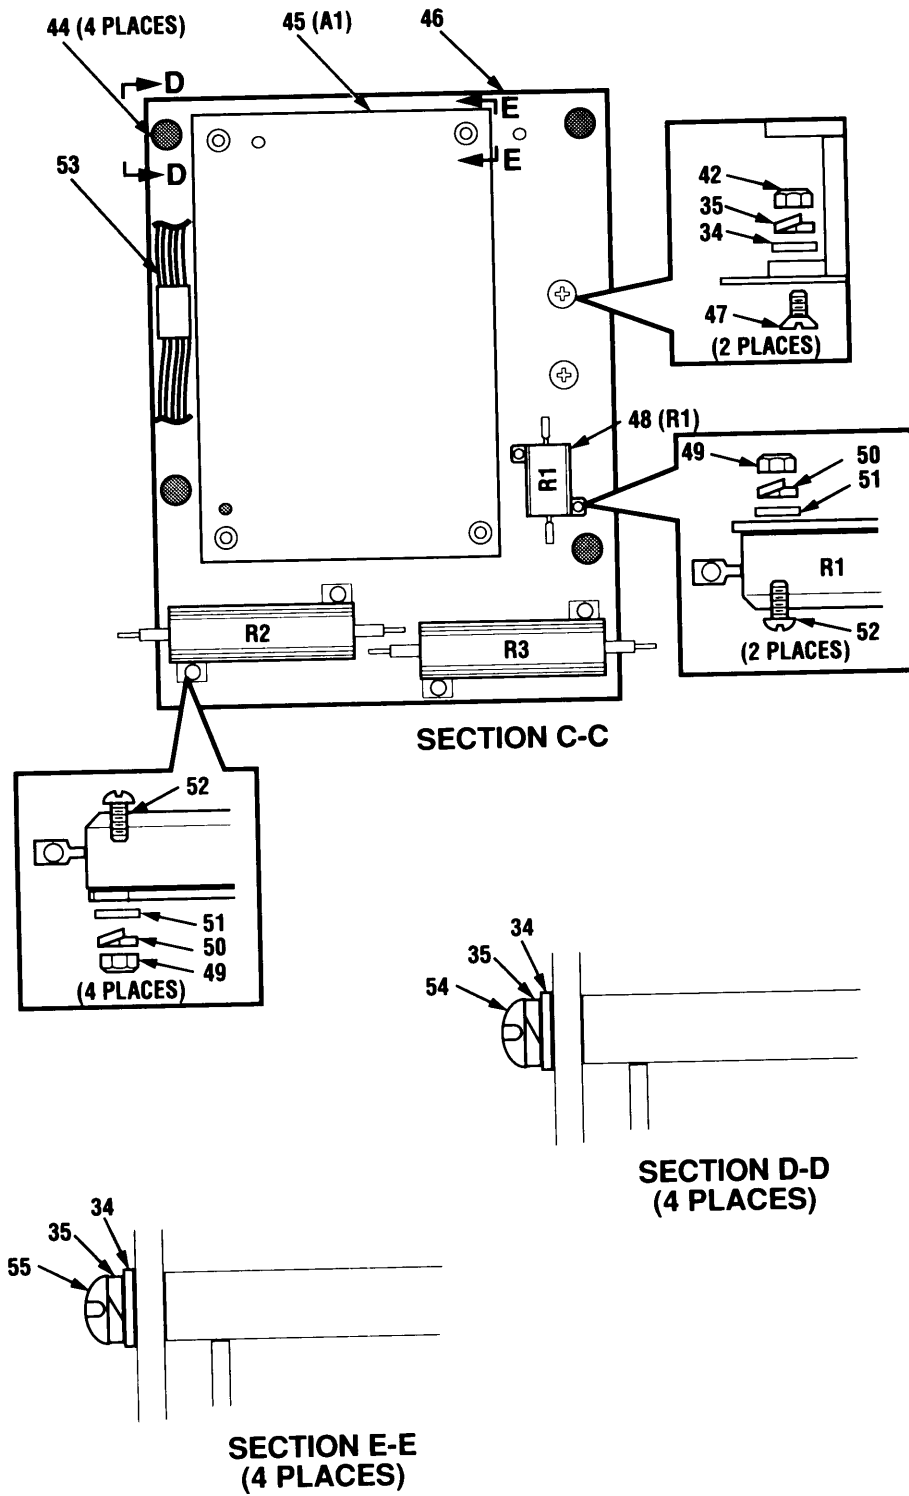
Front Panel Assembly (1-94281.0000//A) (Sheet 3 of 5)
